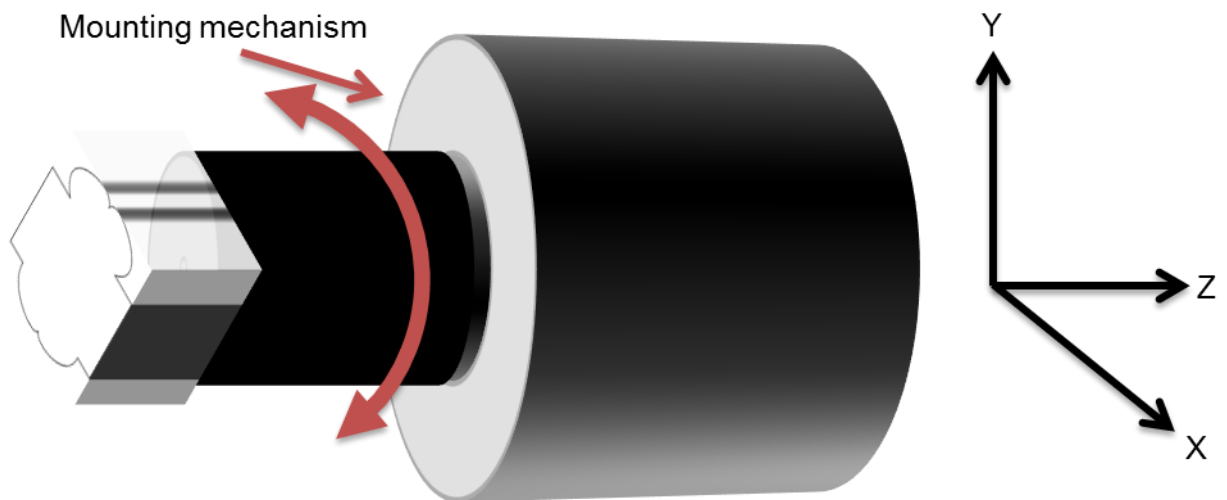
Illustration of the mounting mechanism, the bold arrow shows the Z-axis rotation of the specimen
